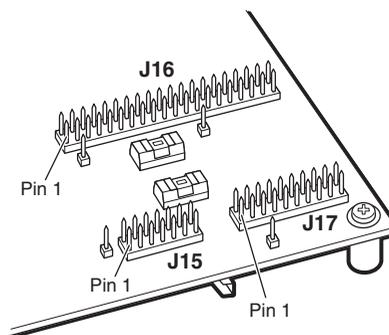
PROTO2 Expansion Prototype Connector - J15, J16 & J17
